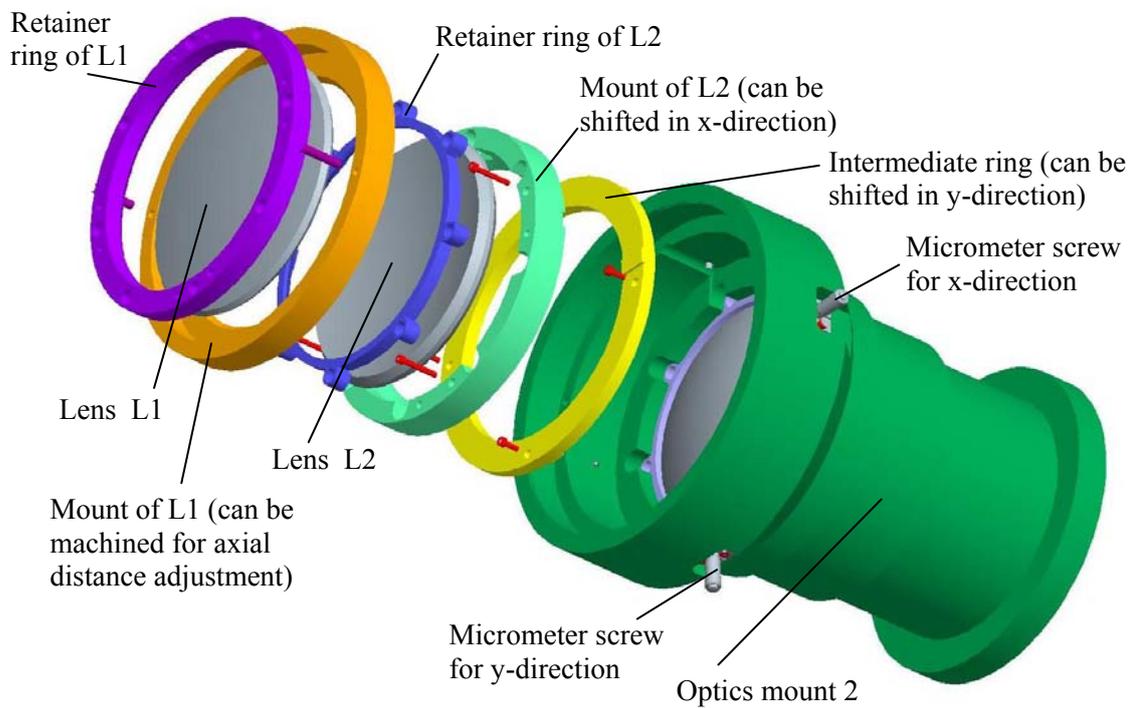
Optics mount 2 with mechanical decenter adjustment of lens L2 with micrometer screws (exploded view).
